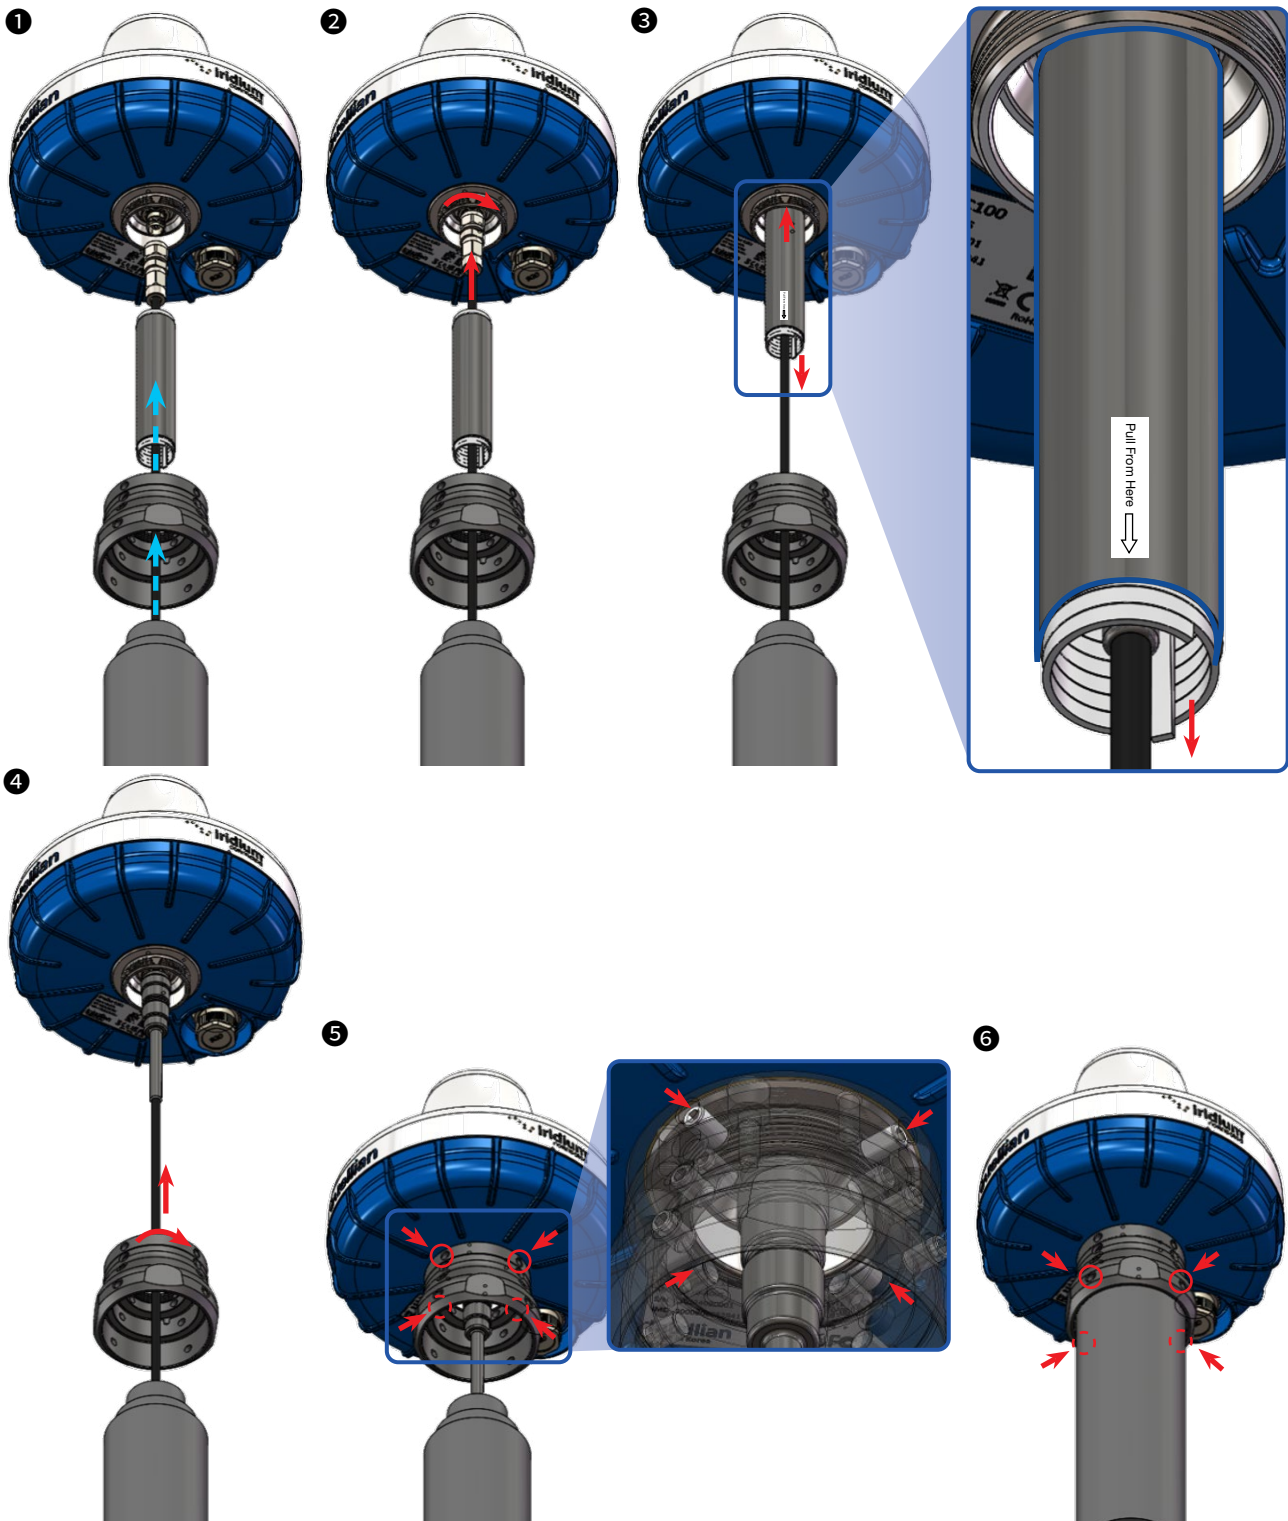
Aligned Mounting with Internal TNC Cable Routing
